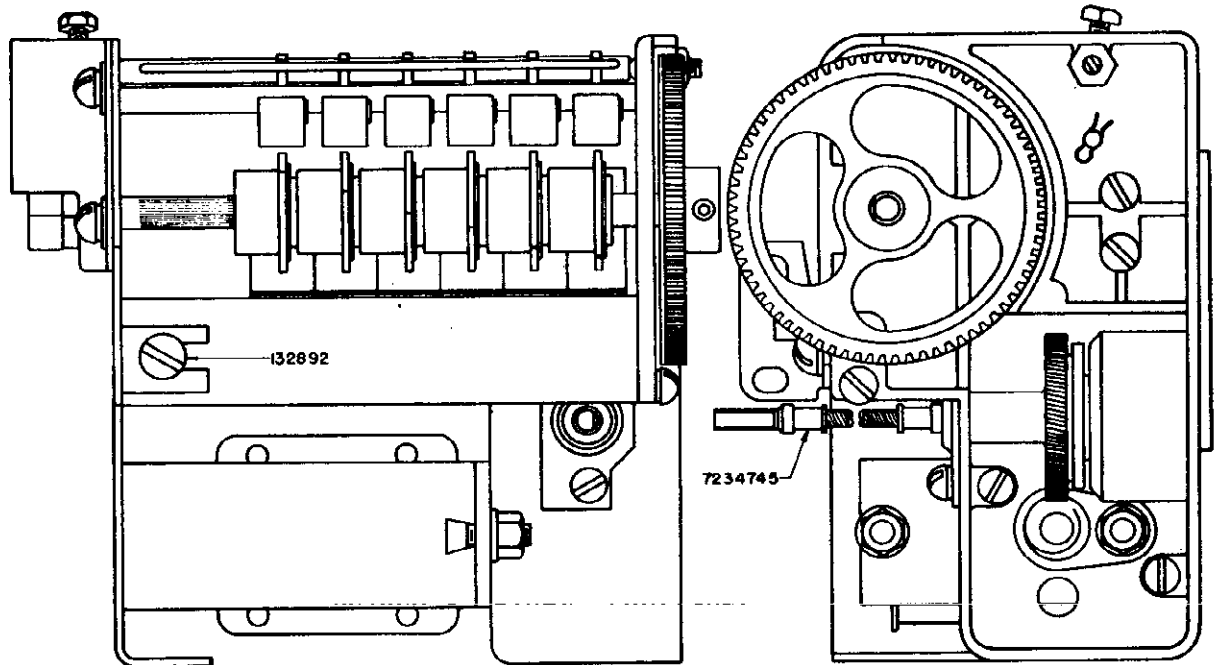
PARTS LAYOUT--DELCO-MATIC TUNER
